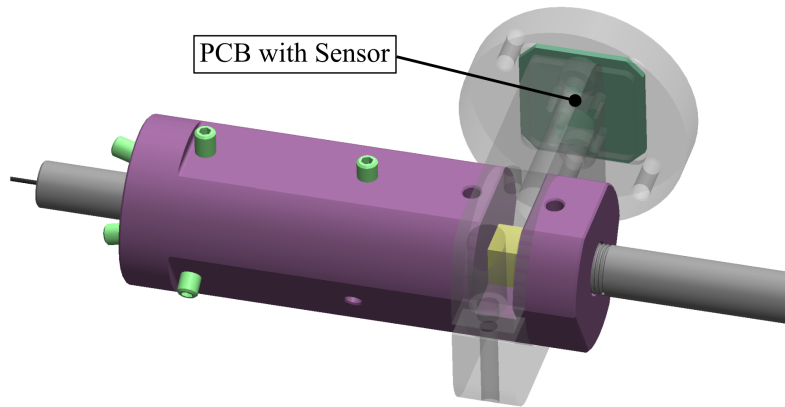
CAD model of the component for mounting the PCB containing the position sensor. The mounting mechanism allows the sensor to be adjusted relative to the beam splitter. Ensuring that the laser beam will hit the sensor area.
